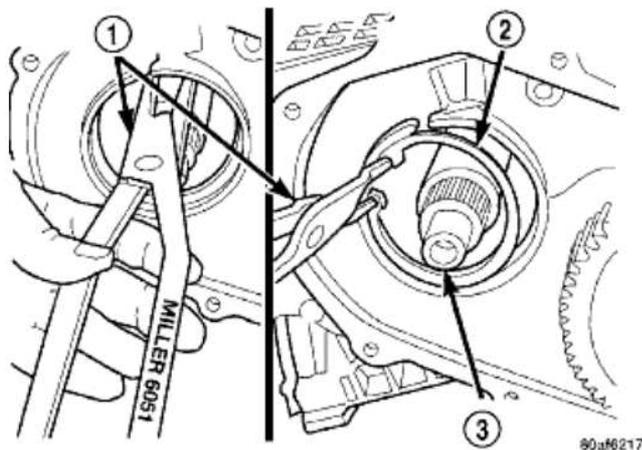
Removing/Installing Transfer Shaft Bearing Snap Ring
